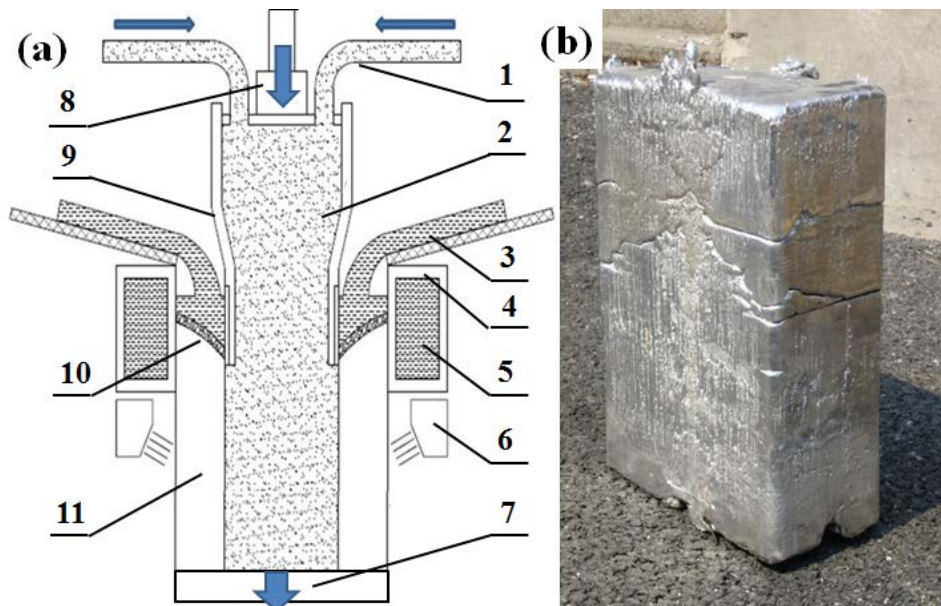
(a) The schematic diagram of semi-continuous casting equipment, 1-feeder of powder, 2-powder, 3-CPAl melt, 4-mould, 5- 1st cooling water, 6-2ed cooling water, 7-drawing drive,8-pressure head, 9- inner mould, 10-solidification interface, 11-layered structure composite ingot, (b) real product of BRALC
